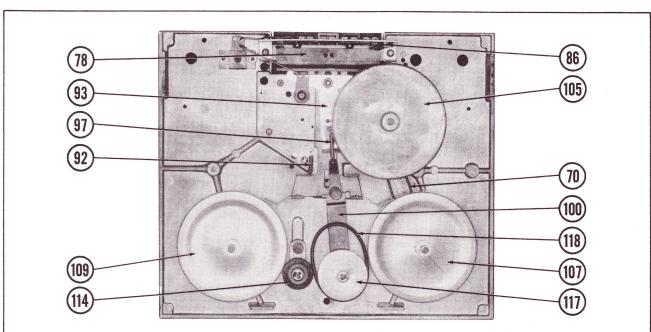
Bottom view of transport mechanism - motor mounting plate removed.
